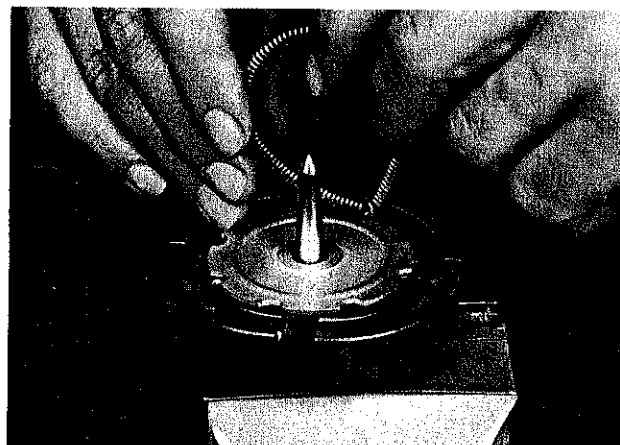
Starting assembly of the clutch, the hooked ends of the spring should be started into the clutch groove first.
